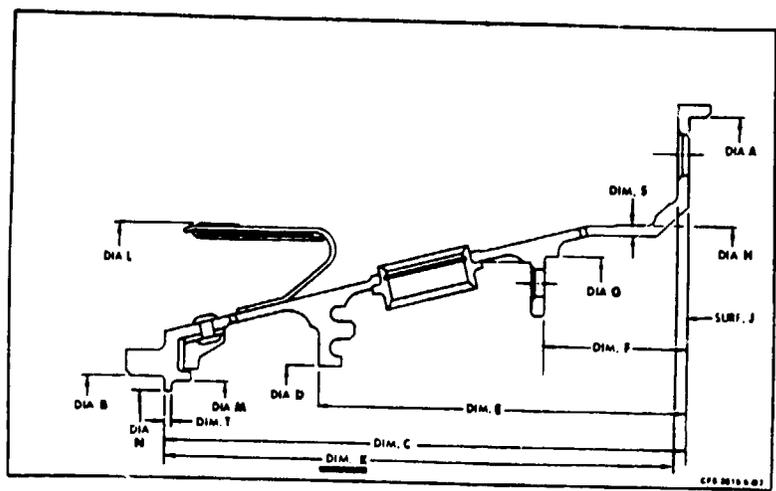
Dim. "K" - Stage 2 HP Turbine Nozzle Support Measurement.
